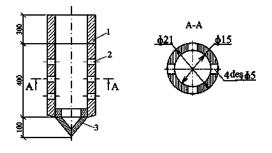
Injection tube: 1-tube; 2-hole; 3-head.
